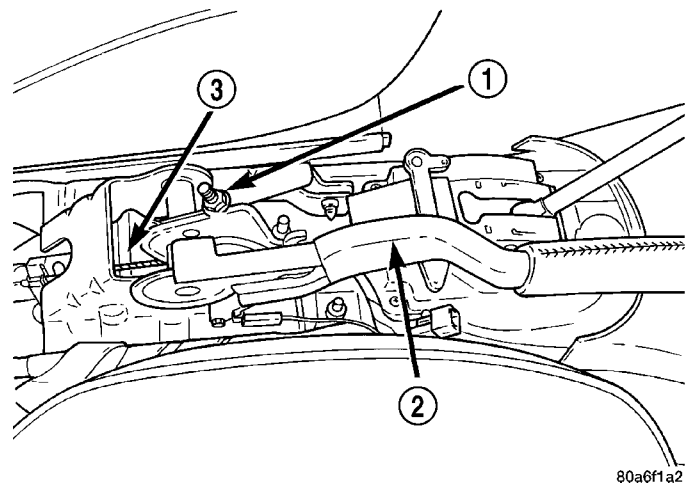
Park Brake Lever Output Cable Adjustment Nut (Typical)
